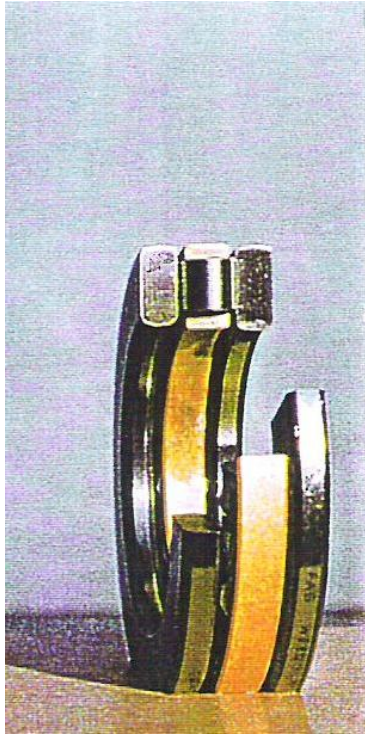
Sectional view of the Thrust bearing 81212 (picture courtesy: Schaeffler AG, Germany)
